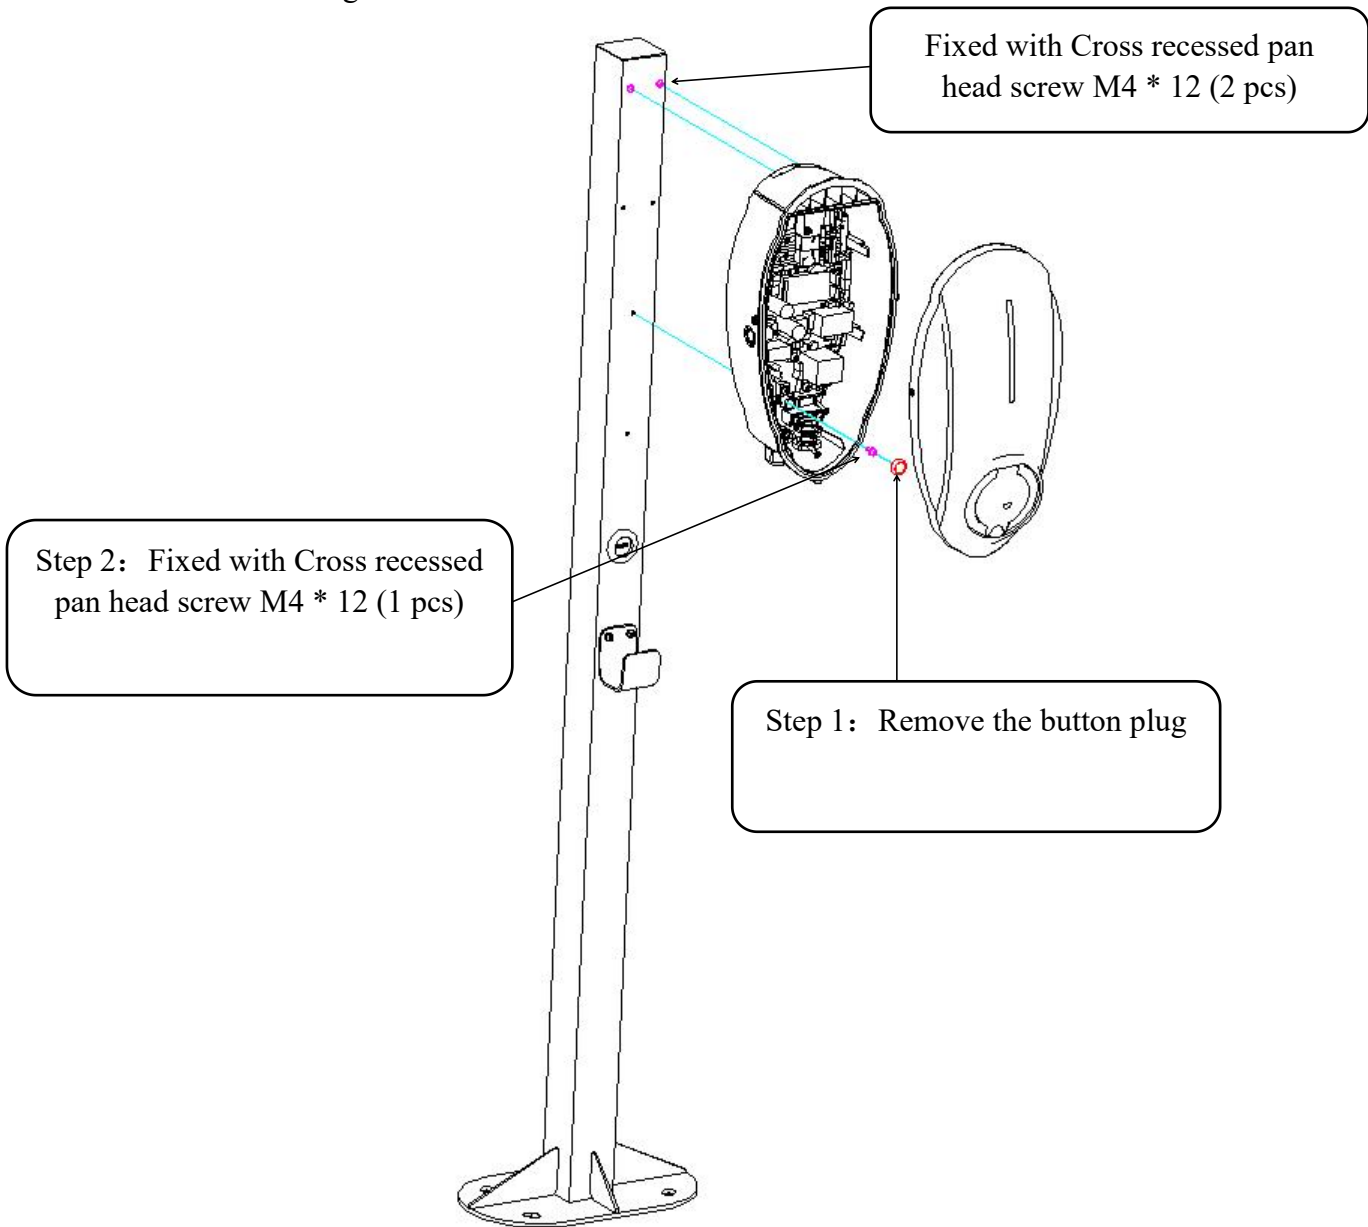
Installation Drawing of Column Cross Recessed Pan Head Screw M4 \* 12
